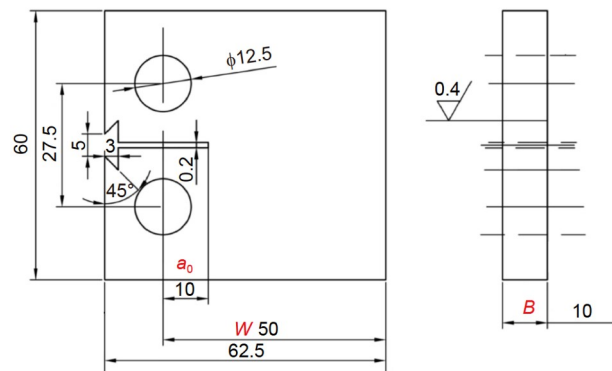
(Color online) Geometric dimensions of the CT specimen.
